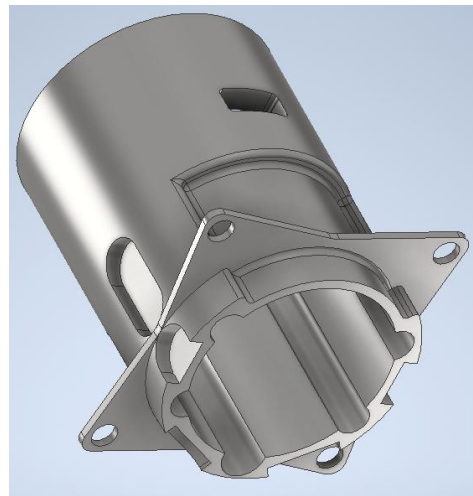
Cylinder of the designed engine made of 36NiCrMo16 steel; the intake ducts are visible on the inner surface
